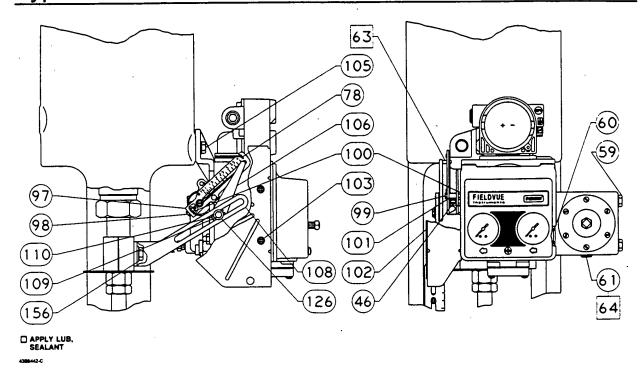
Type DVC5010 Series Digital Valve Controller mounted on Type 657/667 Size 70-100 Actuator with Integrally Mounted Filter Regulator
